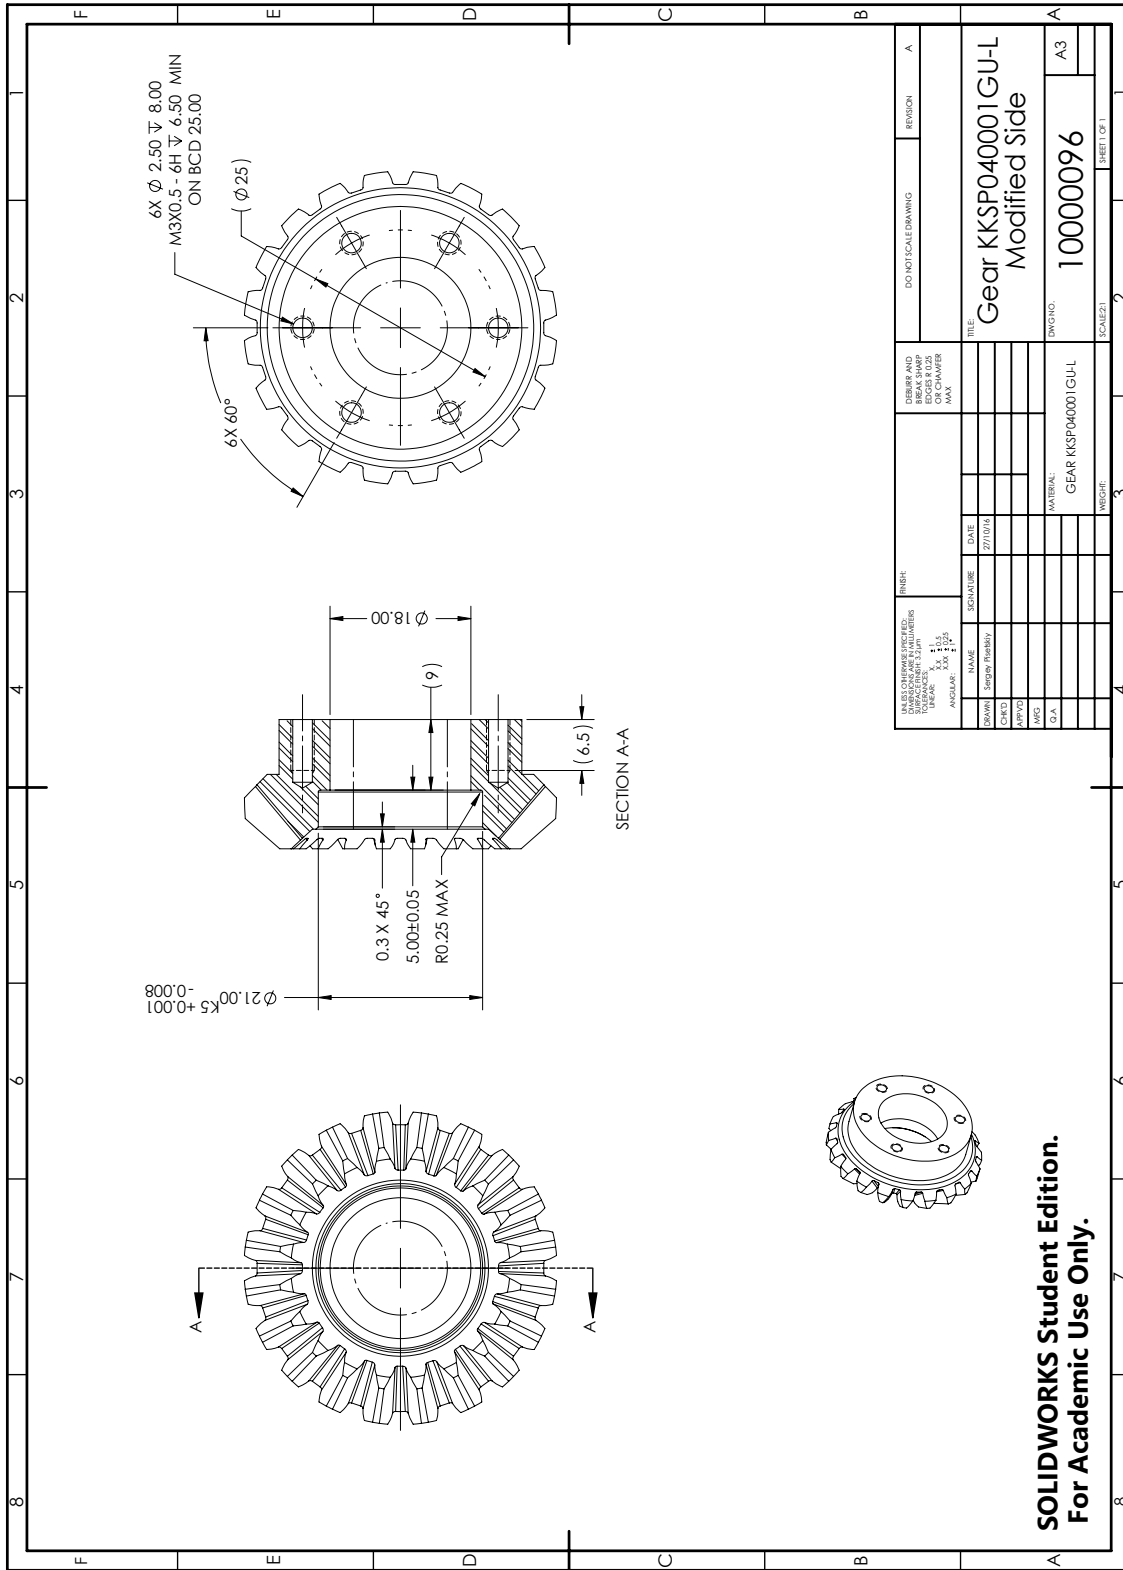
Drawing: Gear KKSP040001GUL modified, side.
